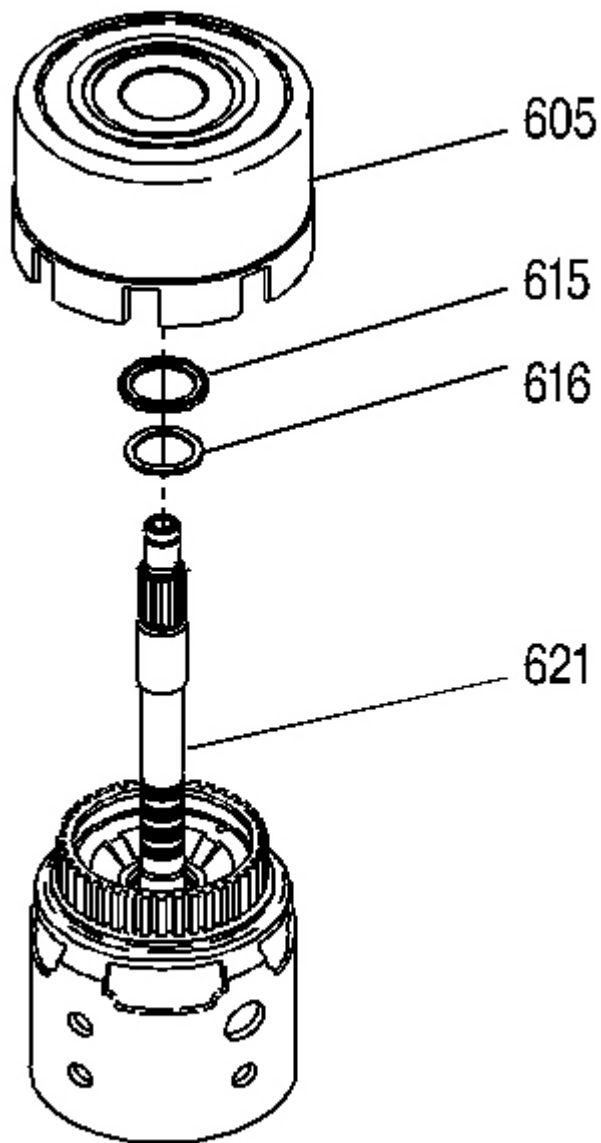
View Of Stator Shaft/Selective Washer Bearing Assembly
